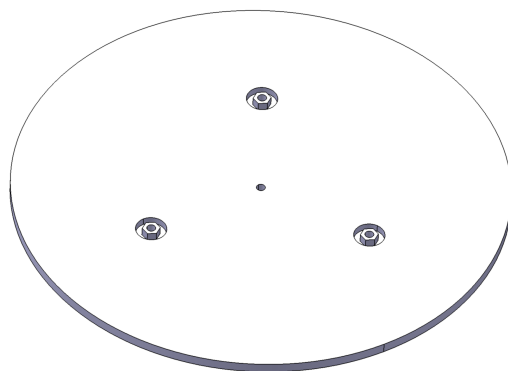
This is a detail of the concrete pad cover plate. It can be bolted to the three threaded rods coming from the concrete pier. To aid removal there is a center 1 inch threaded hole to mount an eyebolt.
